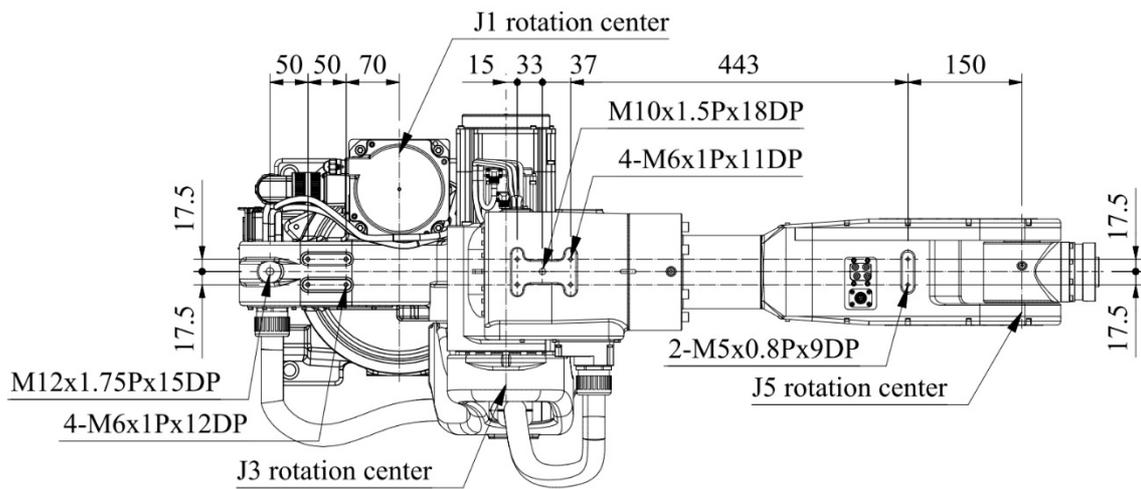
(c) RA610-1476-GA Mounting surfaces on the robot
